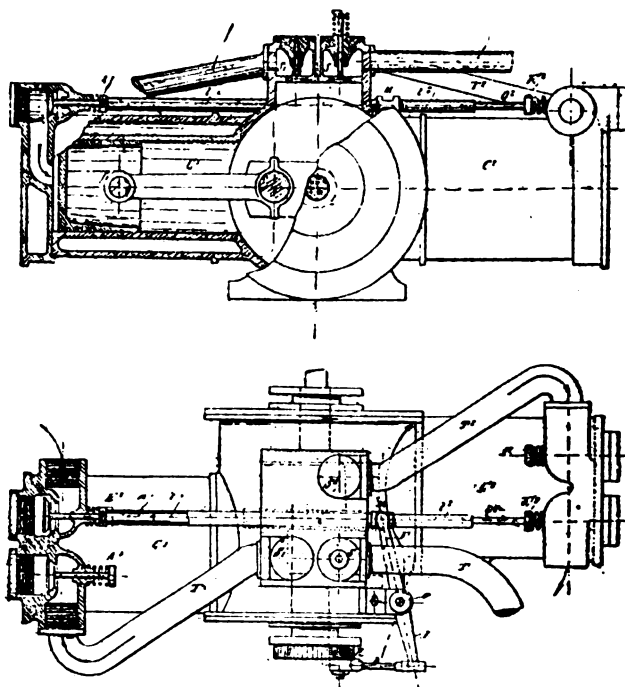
Part Sectional, Elevation and Plan of Crouan Motor.
